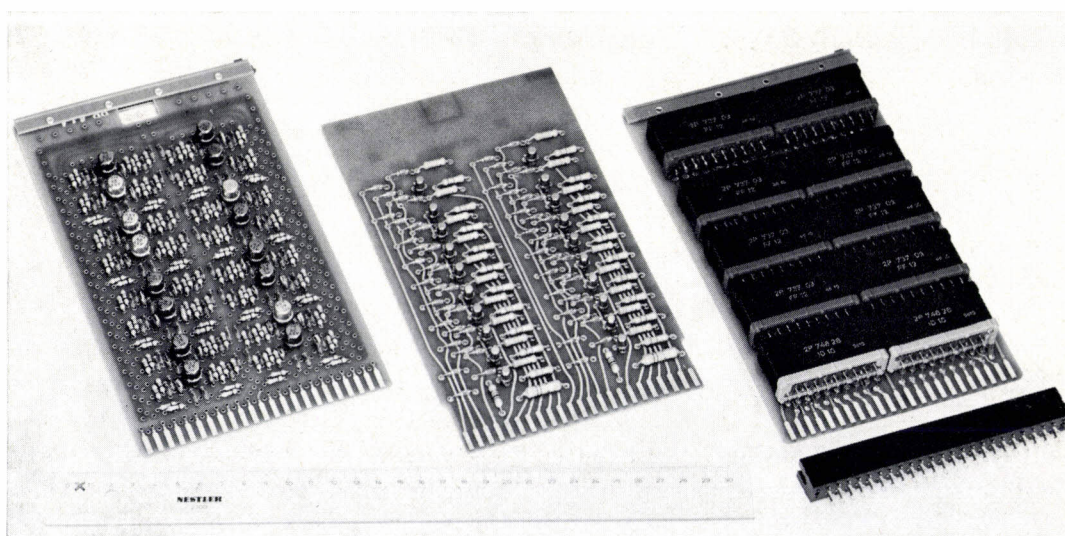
On the right, some circuit blocks in the 20-series mounted on a printed wiring board. On the left, the same circuit made up from separate components, to illustrate the space-saving achieved with the blocks. With separate components, two printed circuit boards are required.
